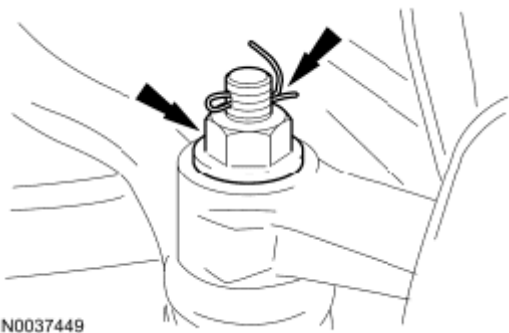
Locating Tie-Rod Ends Cotter Pins & Nuts
